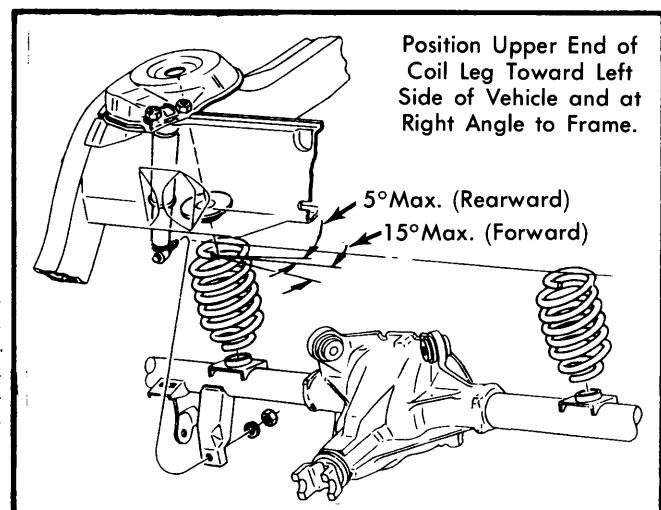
Coil Spring Installation (All Models Except Cadillac)
